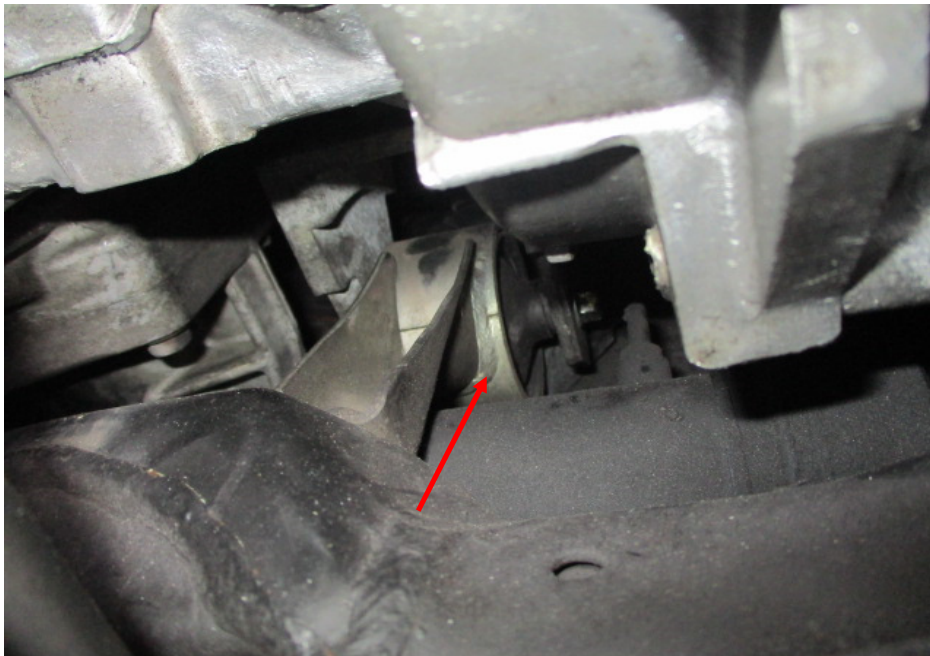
shows one of the 2 brackets that supports the transmission assembly of the Motor Car. This was the bracket at the rear of the transmission assembly, which was observed to be mounted onto the Motor Car's crossmember. The bracket (arrowed) was with rubber bushings, which absorbs any vibrations arising from the rotation of the transmission gears, minimising any stress to the bracket and correspondingly also minimise any stress to the crossmember that this bracket is mounted onto.
